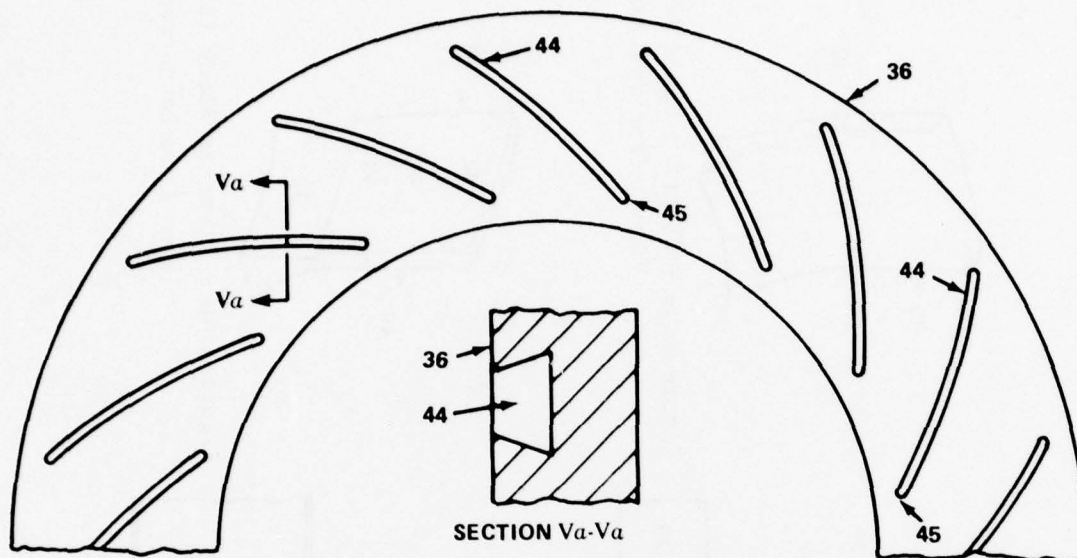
Combination Cam/Ring Gear as Viewed from Upstream
